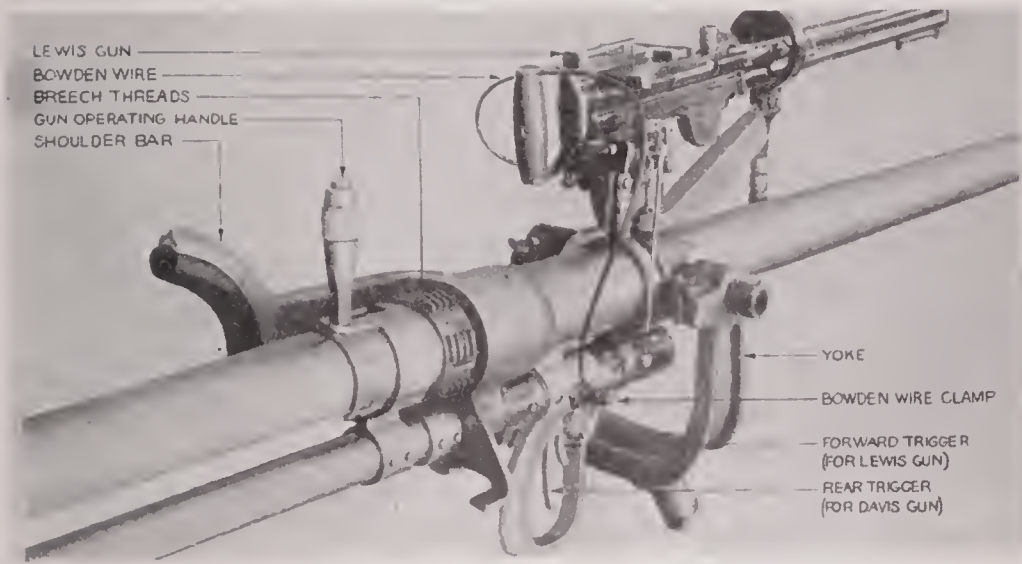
REAR BARREL UNSCREWED AND PULLED TO THE REAR READY TO ROTATE TO THE RIGHT. NOTE ALSO GENERAL ASSEMBLY.
